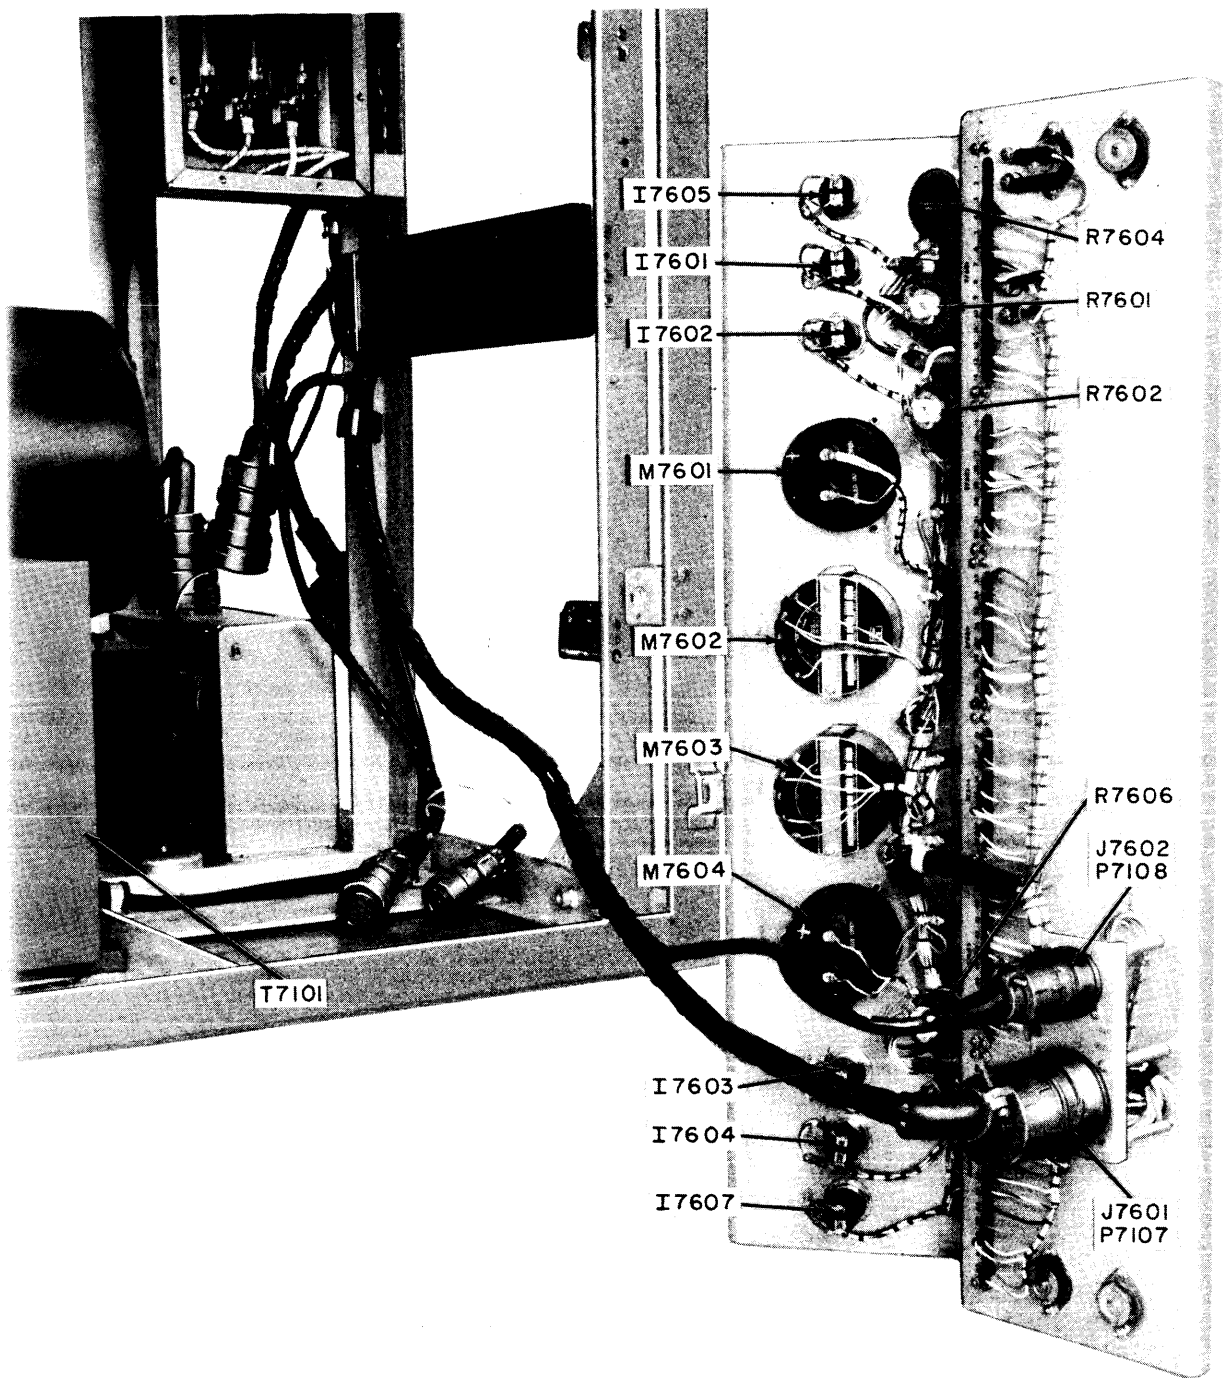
Rear View with Callouts, Indicator Control Panel, GPT-40K
